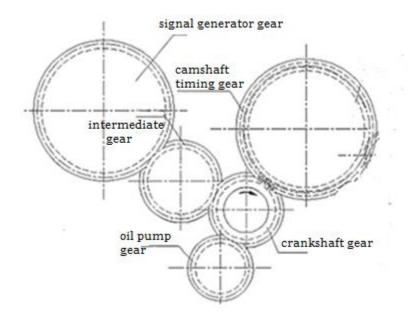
14 Crankshaft gear and camshaft meshing diagram
